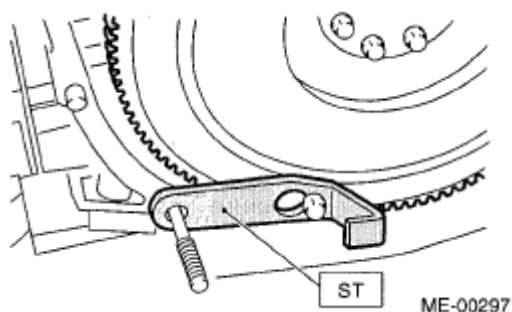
Locking Crankshaft Using Crankshaft Stopper ST (498497100)- MT Model
